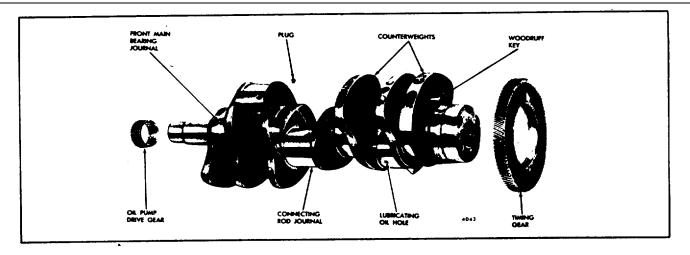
Crankshaft Details and Relative Location of Parts.
